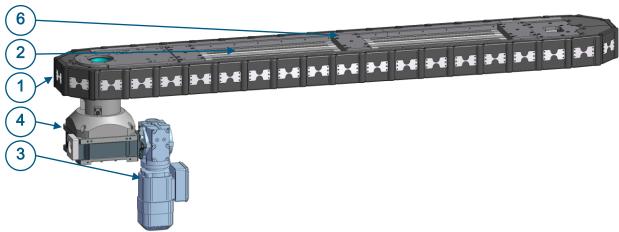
Construction of Linear transfer system LFA with drive unit rotary indexing table type RT - TT
